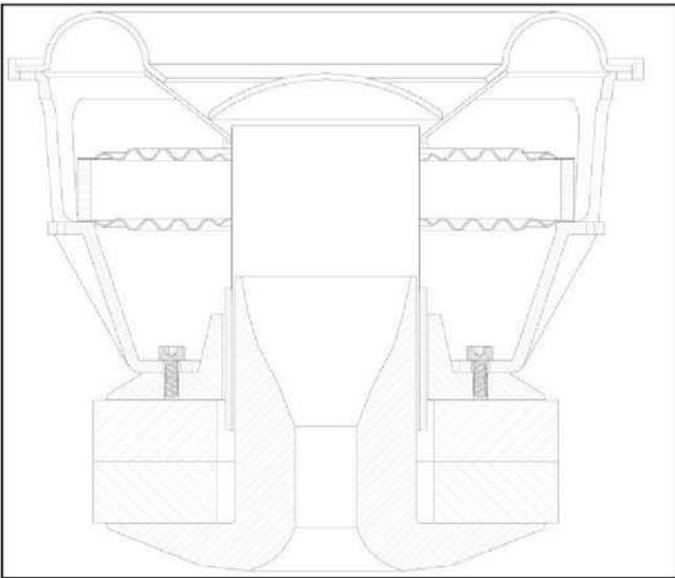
Sectional illustration of a decade-old wellhung voice coil 10" transducer assembly.
